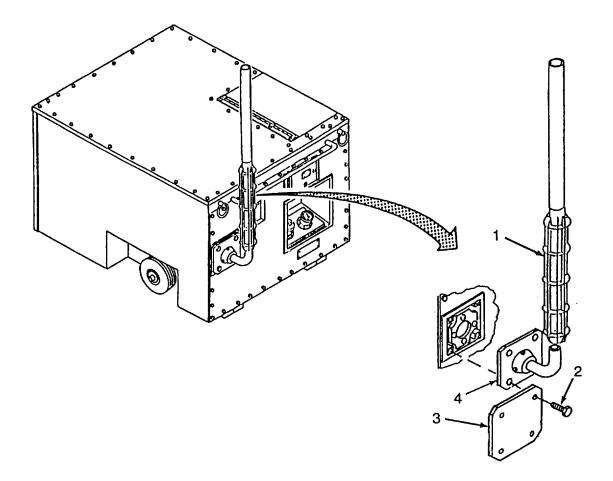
Exhaust Pipe (Sheet 2 of 2)
